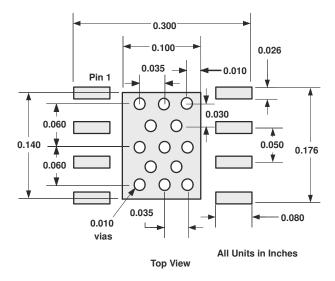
DDA PowerPAD™ Integrated Circuit Package PCB Etch and Via Pattern
